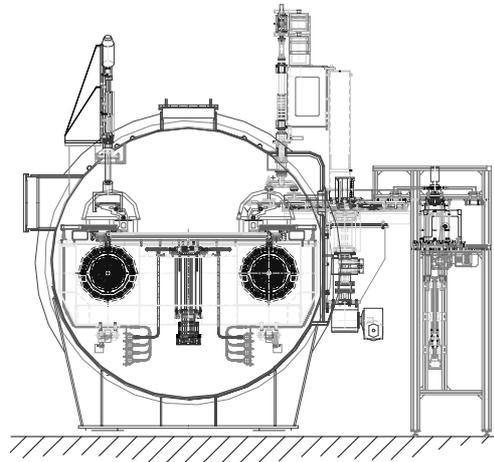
Cross section of the RGS machine. In the lower part of the vacuum vessel the mechanical drive is enclosed, while in the upper section the furnace and casting sections are situated. Wafer stacker and wafer load lock is shown on the right. The diameter of the machine will be about 3.5 m.
